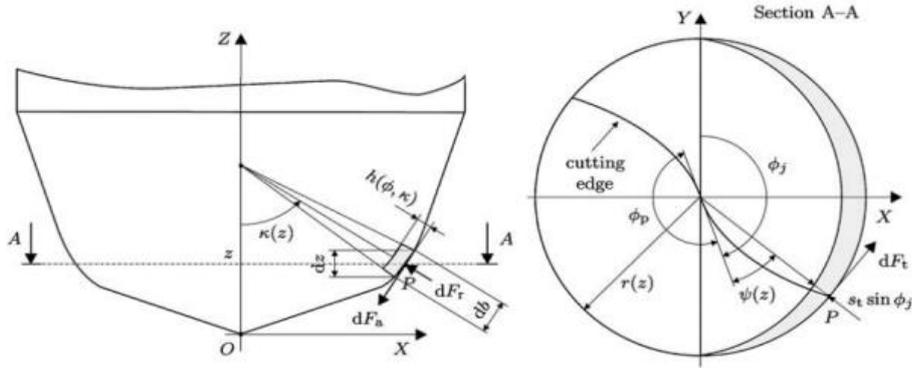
Chip cross-section, adjustment angle and differential cutting forces at point P[7]
